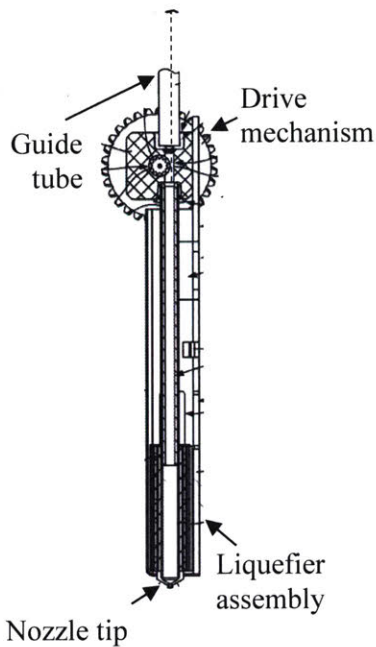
1 Extrusion apparatus in Mojo machine [20]
